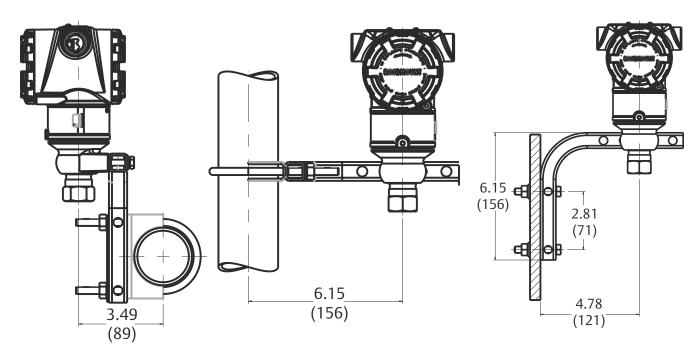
Rosemount 3051T Typical Mounting Configurations with Optional Mounting Bracket
